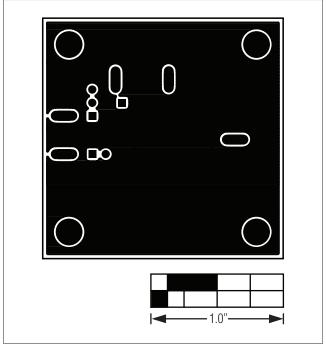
MAX4470 EV Kit PCB Layout—Solder Side
